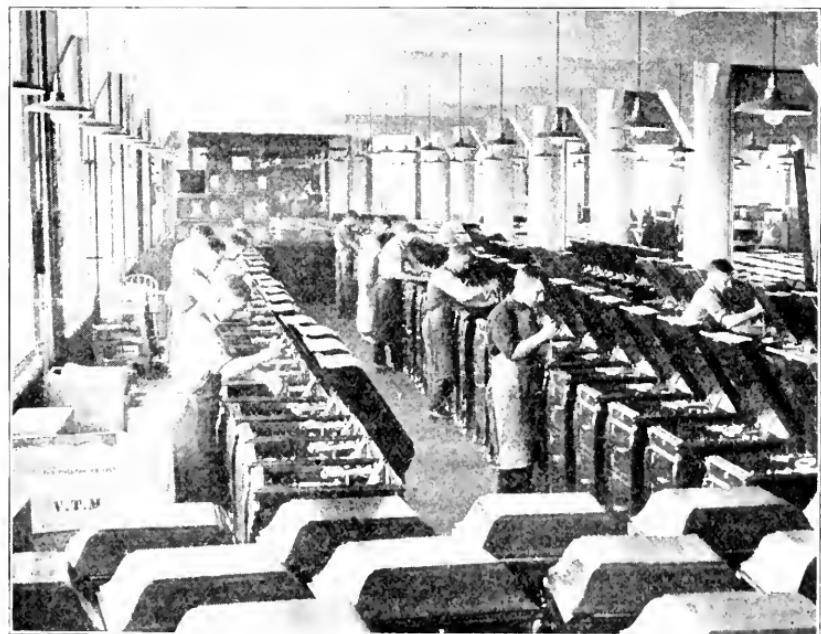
In this room the mechanical parts of the phonographs are finally adjusted to make the complete machine
